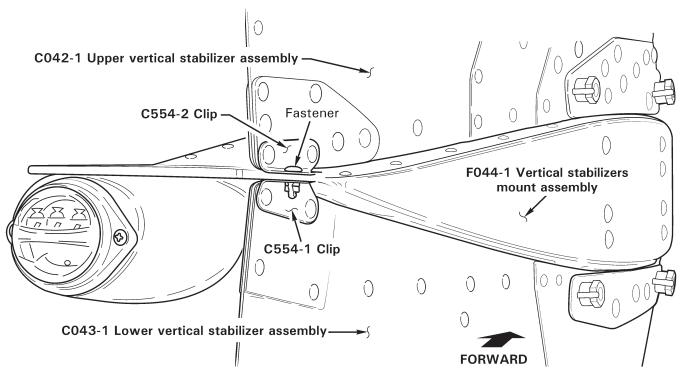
F004-2 EMPENNAGE ASSEMBLY
